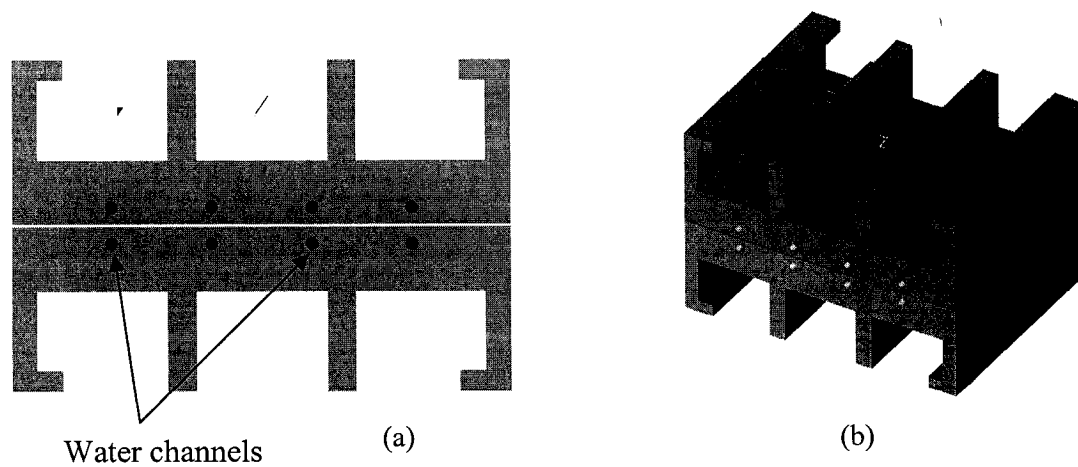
(a) Front view of the mold geometry (b) Isometric view of the mold
